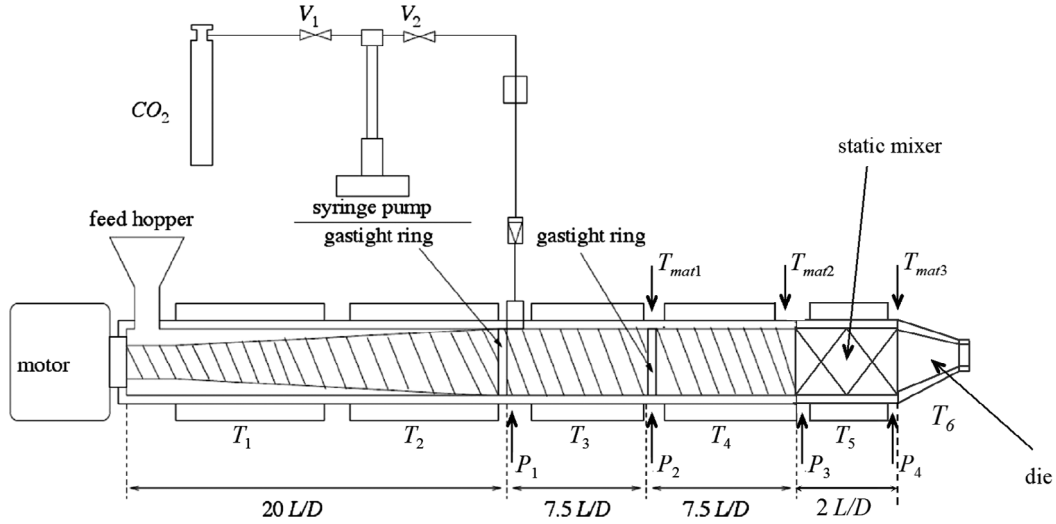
The single-screw extruder used with its CO₂ injection device
